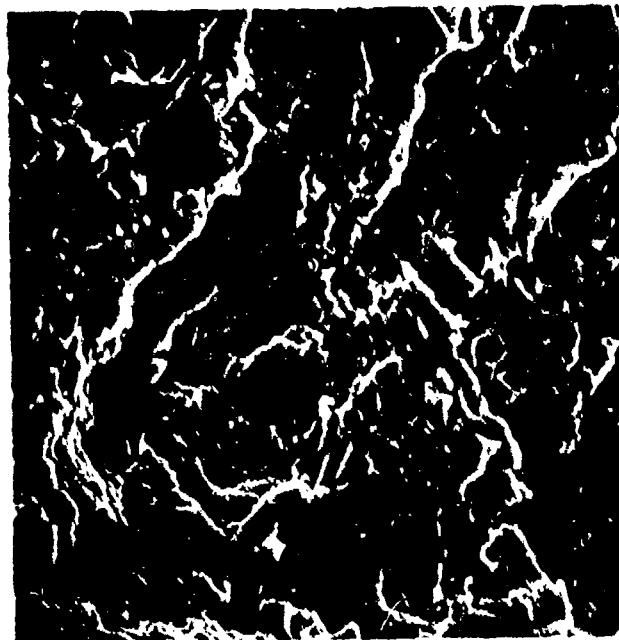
Fatigue markings on fracture surface of a temper-embrittled A-514 weld fatigue specimen, 1500x.
